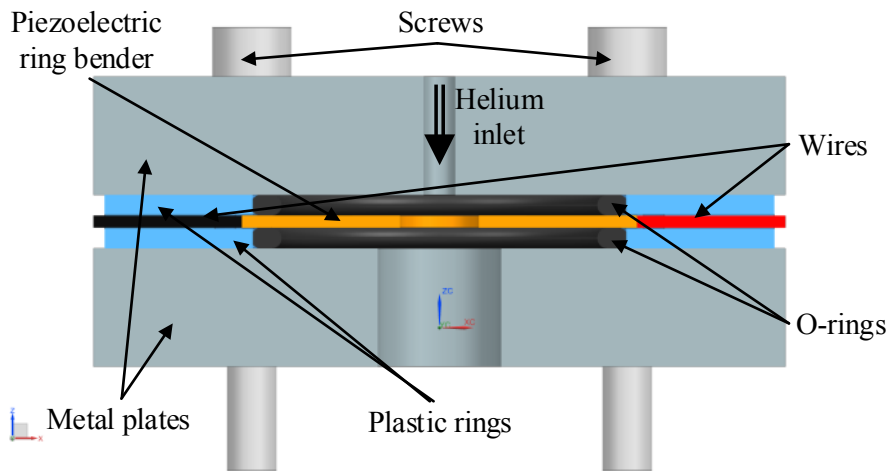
Cross section CAD illustration of the helium testing test hardware showing how the piezoelectric ring bender is sandwiched between two O-rings.
